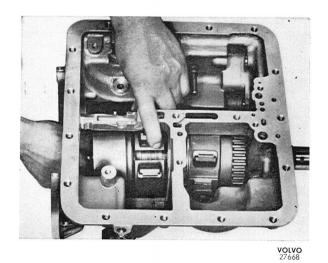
Withdrawing rear clutch and forward sun gear assembly
